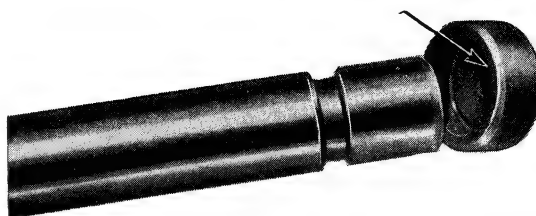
Detail of a valve stem and differential thickness cap for tappet clearance adjustment on engine 118 B.000.
